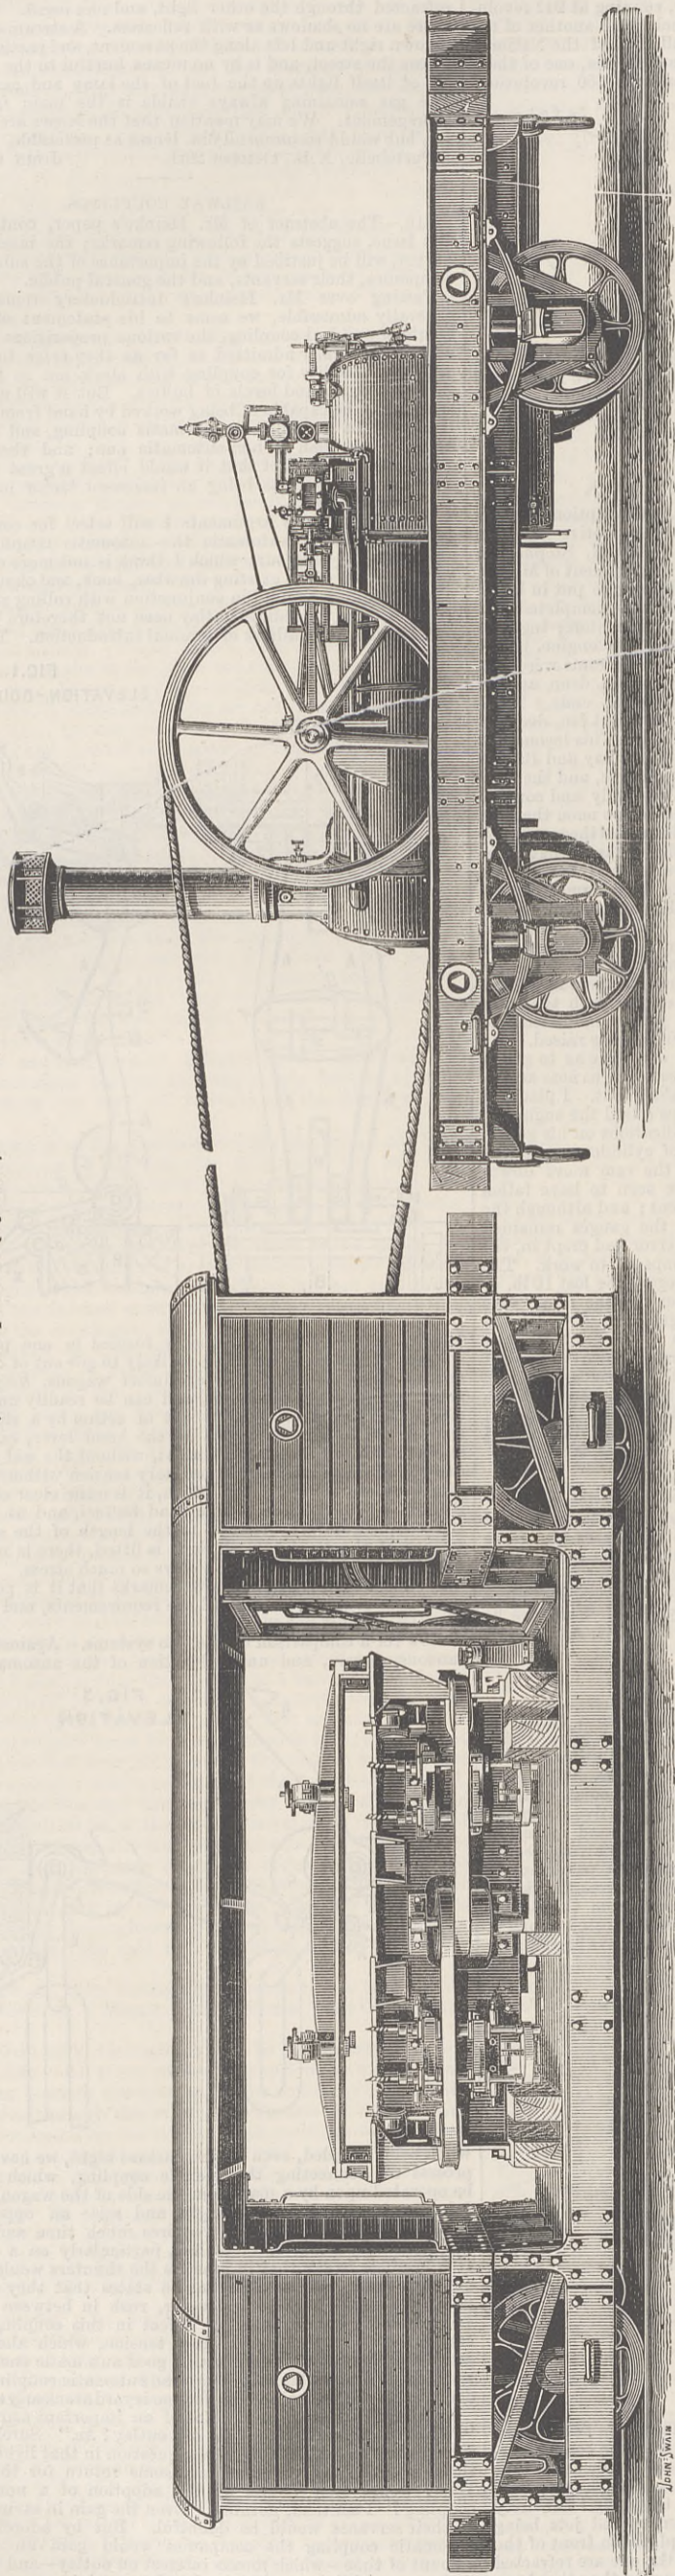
PORTABLE SLEEPER ADZING AND BORING MACHINE AND ENGINE.
